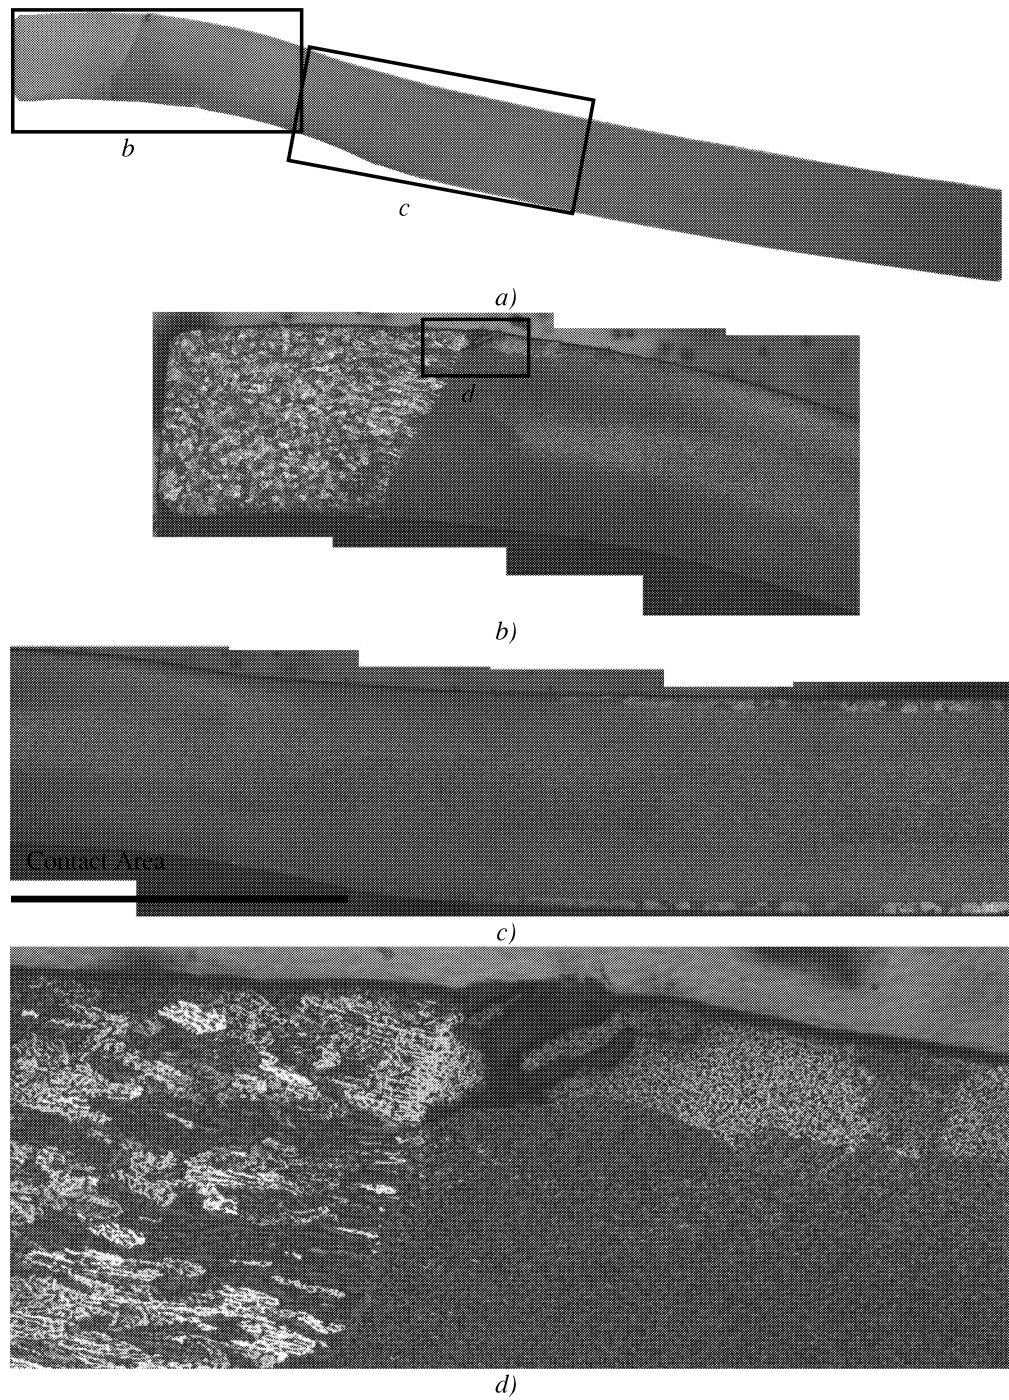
Section across the fracture in test specimen A2-8: a) Section S1-S1 in Figure 103, b) weld and HAZ, c) a part of the contact area and outside the contact area, and d) frame in a showing fracture on the rear side.
